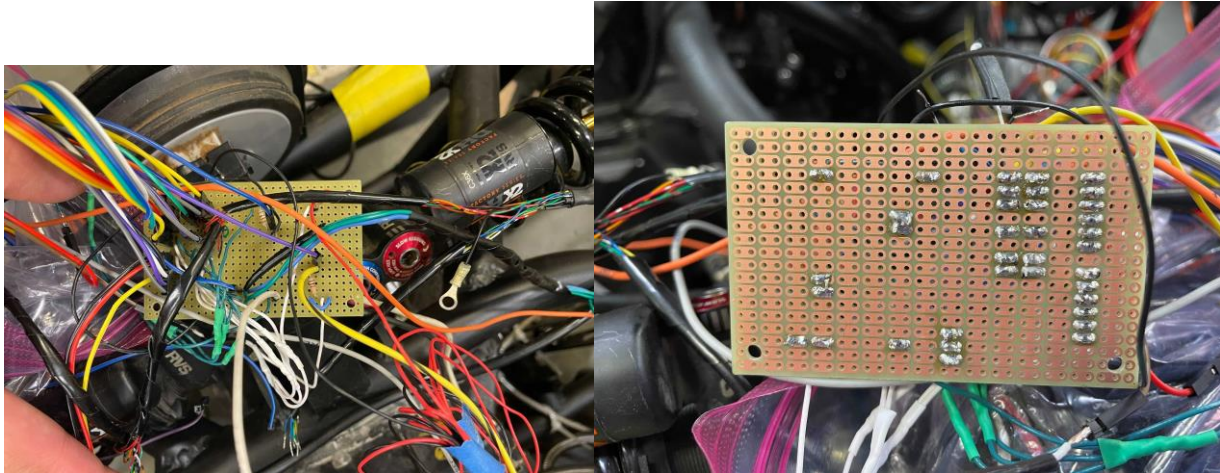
Custom circuit board design. Top view (left) and bottom view (right)
